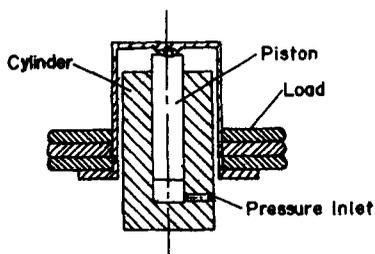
Simple form of piston-cylinder assembly with overhang carrier.
